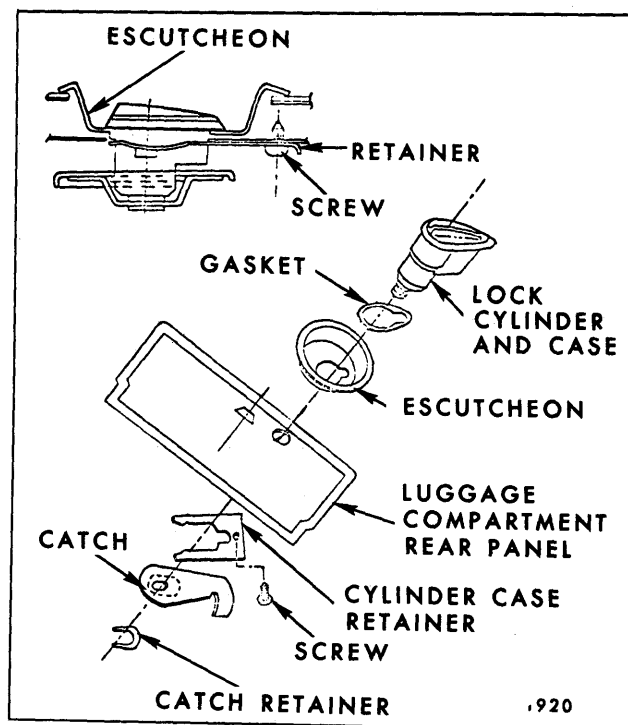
Luggage Compartment Lock - Chevrolet "B" Styles
